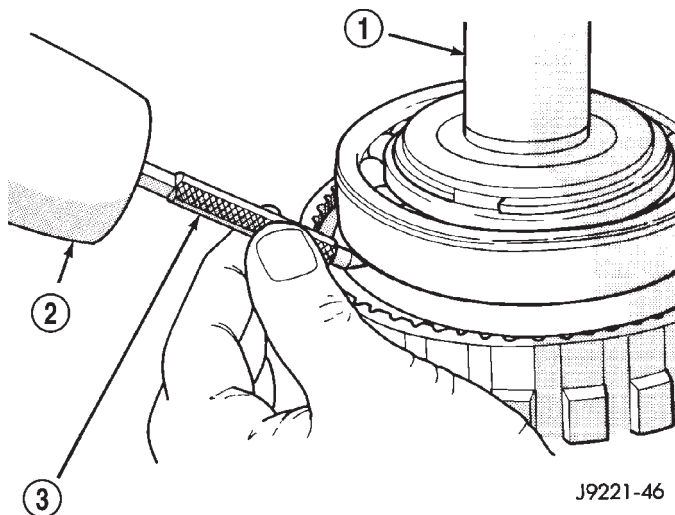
Clutch Drum Inner Retaining Ring Removal
